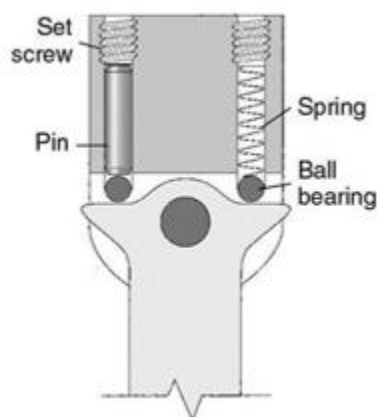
Becker double action joint internal mechanism (adapted from [40]).
